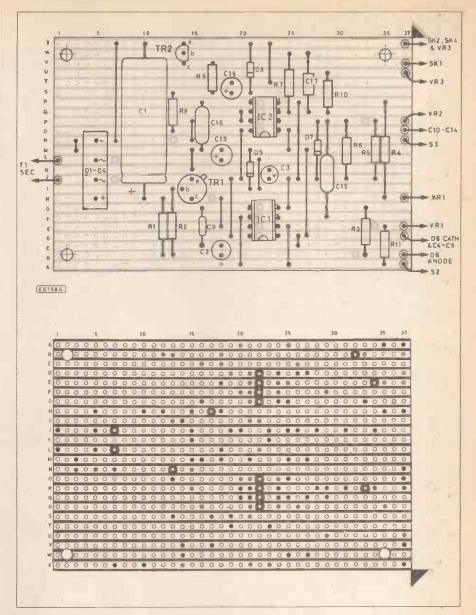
Circuit board component layout and details of breaks to be made in the underside copper tracks.
